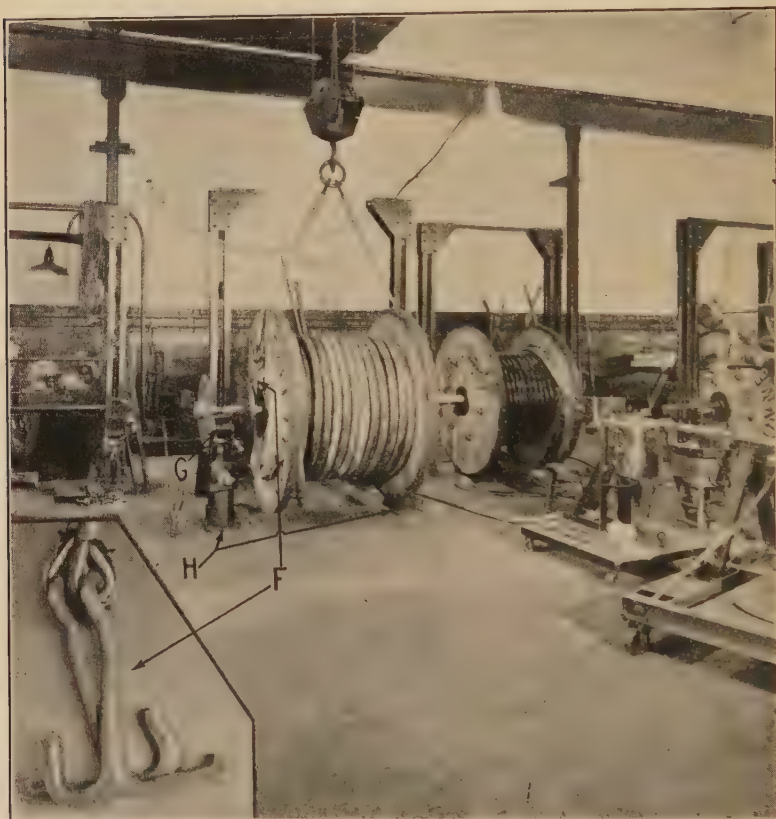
Handling reels. Five ton crane with sling and special design of lifting hooks (F) handles all cable and reels. Note that shaft has just been lifted off roller type cradle (G) Cradles may be lifted by hydraulic jacks (H) if desired. Drive chain is shown removed from large gear.
